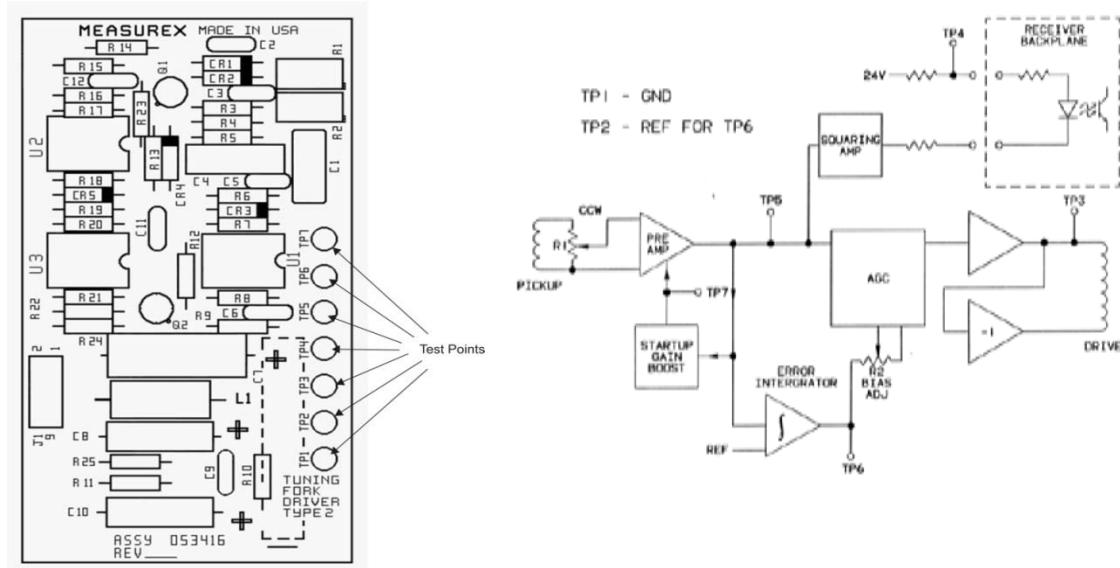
Tuning Fork Driver Board and Block Schematic
